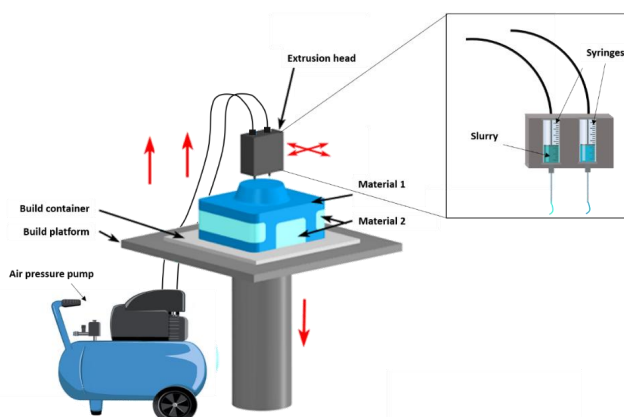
21 Scheme of a robocasting printer (adapted from reference<sup>104</sup>)
